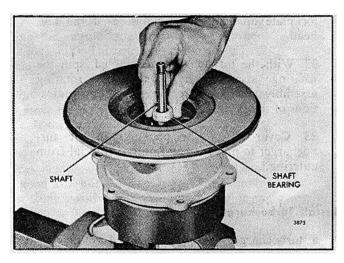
Installing Shaft Bearing in Center Housing (Compressor End)
